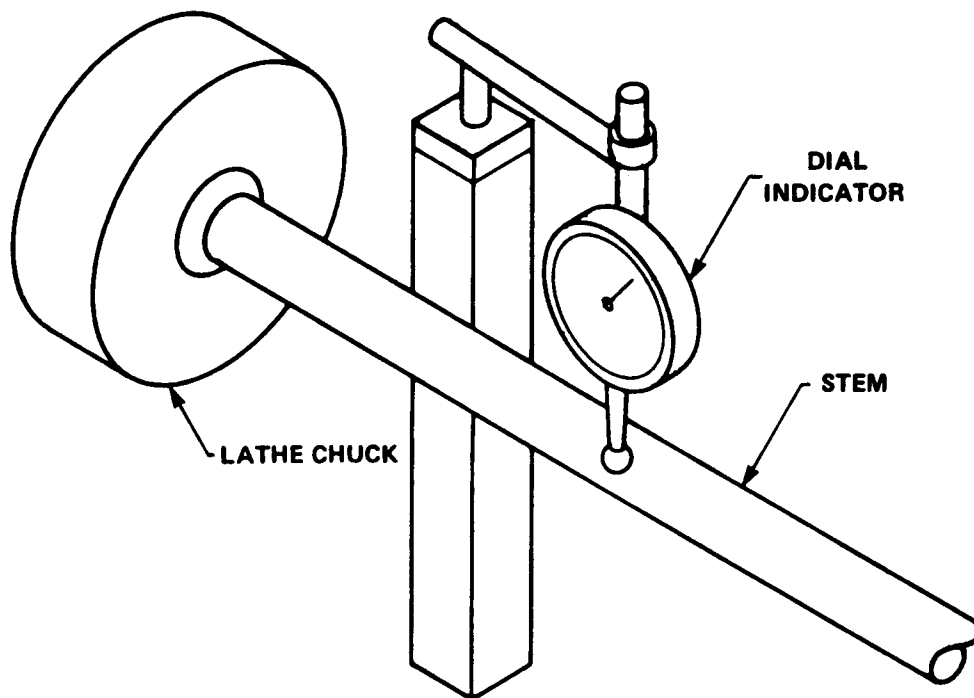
Lathe/Dial Indicator Method of Determining Stem Alinement Total Indicator Reading
